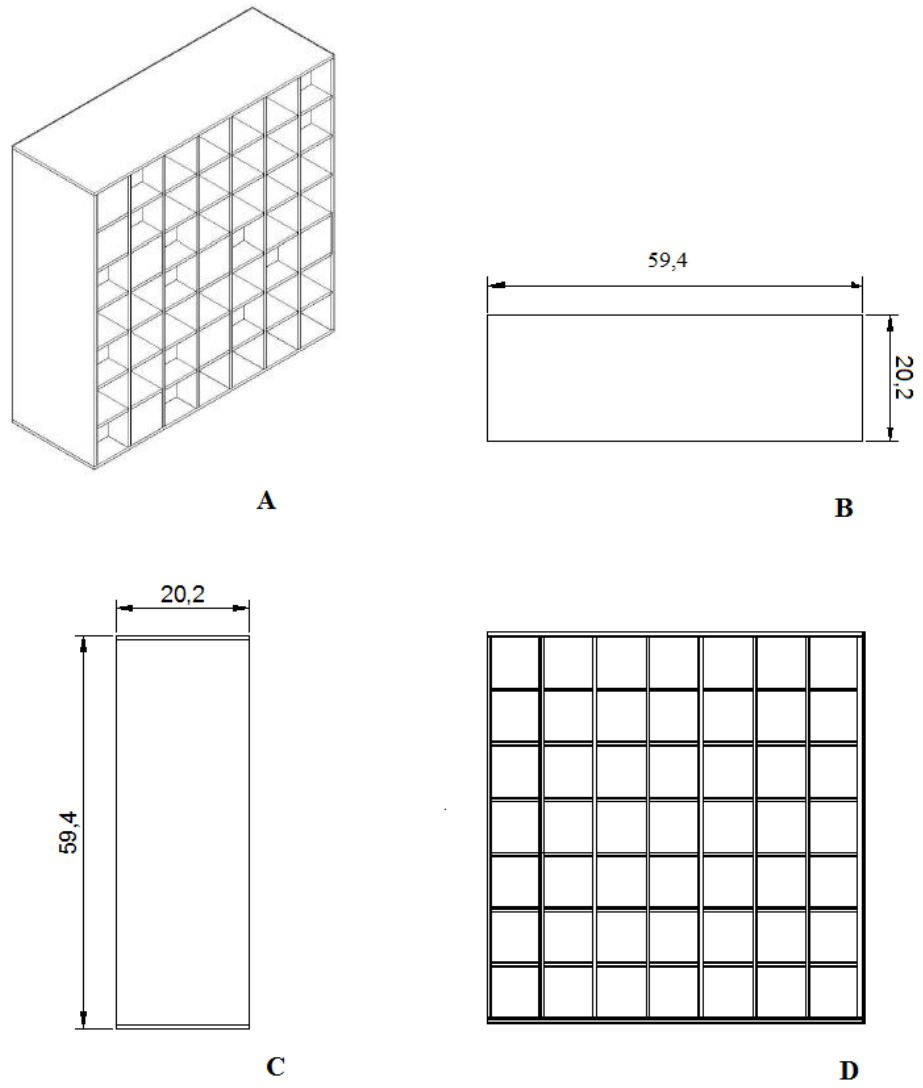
The technical drawings of 2D quadratic residue sequences for  $N = 7$  based on DSP Method for  $m = 1$  A: Isometric View B:Top View C:Left View D: Front View
